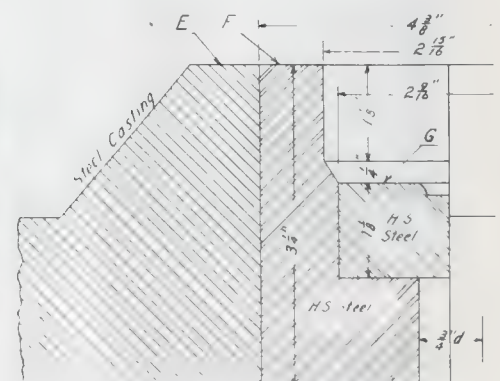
DIE FOR FORGING BRASS SOCKETS.
